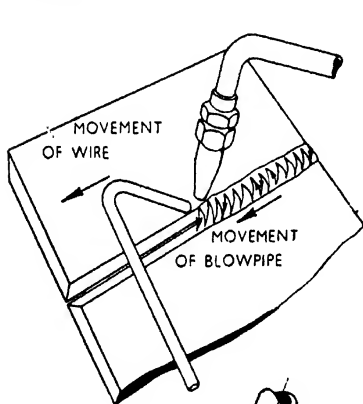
THE LEFTWARD METHOD OF WELDING
